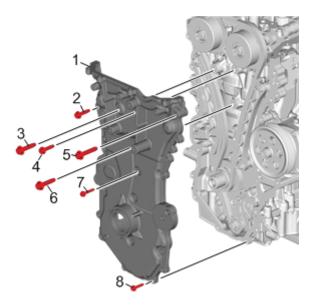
Identifying Engine Front Cover Bolts Courtesy of GENERAL MOTORS COMPANY
